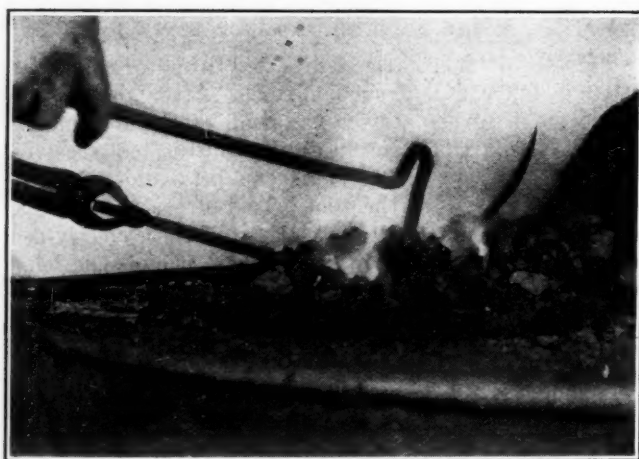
PREPARING BOLT FOR WELDING TO NUT
